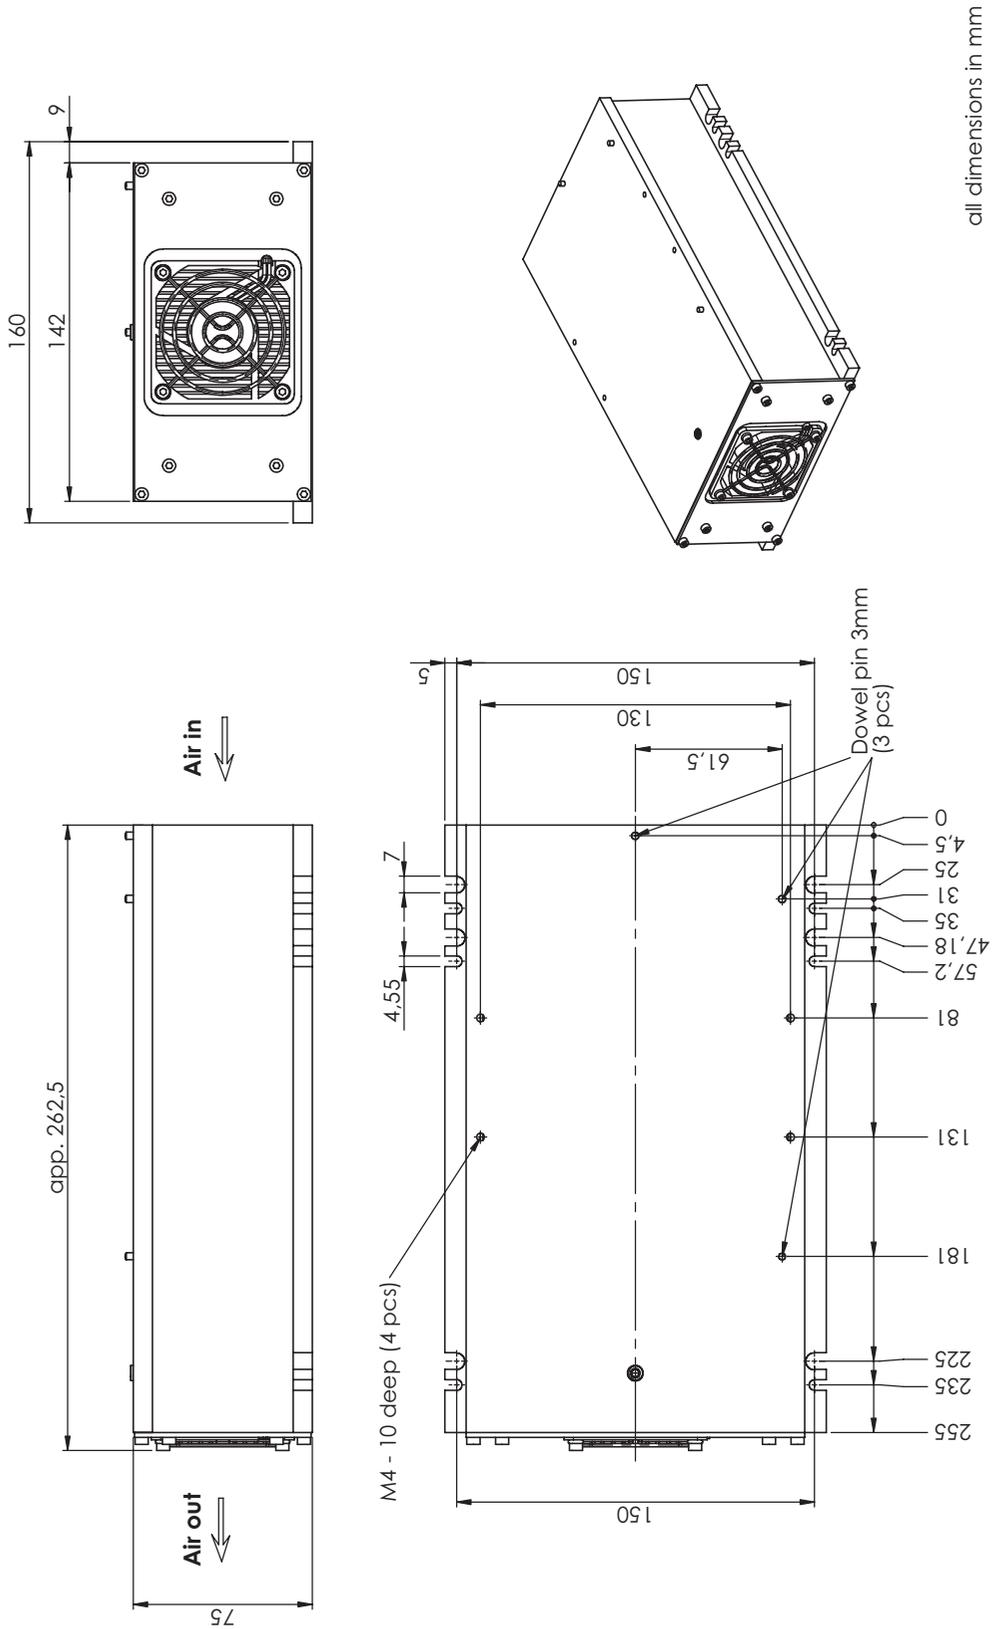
Optional Heat Sink for Laser Head Dimensions
